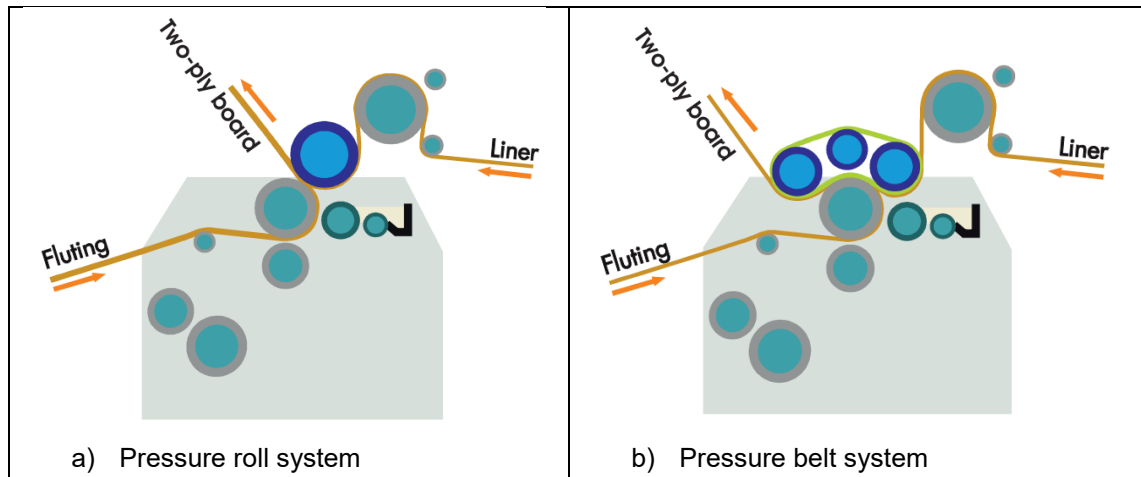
Examples of a pressure belt and a pressure roll systems. Adapted from [22, Figs. 7-8].
